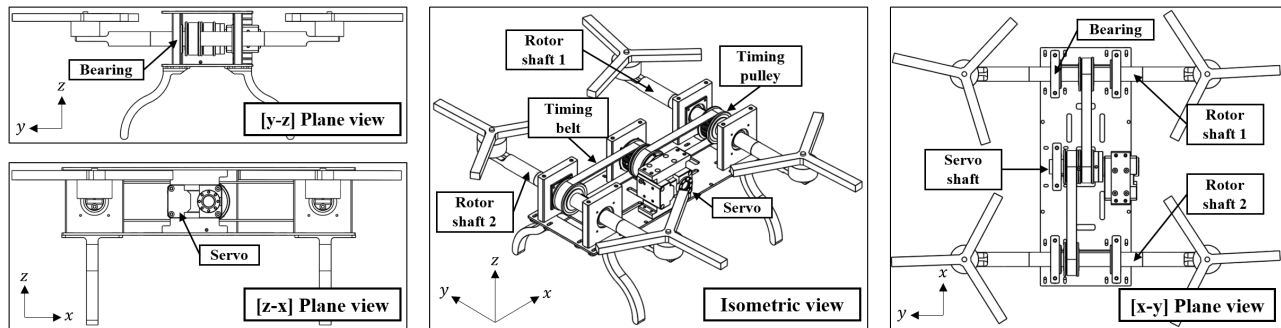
CAD drawings of the tiltrotor. All four rotors rotate by the same angle thanks to the belt-pulley mechanism and a servomotor. Two rotating shafts attached with rotors and one rotating shaft attached to the servomotor are assisted by bearings which are inserted in bearing holders of cuboid shape.
